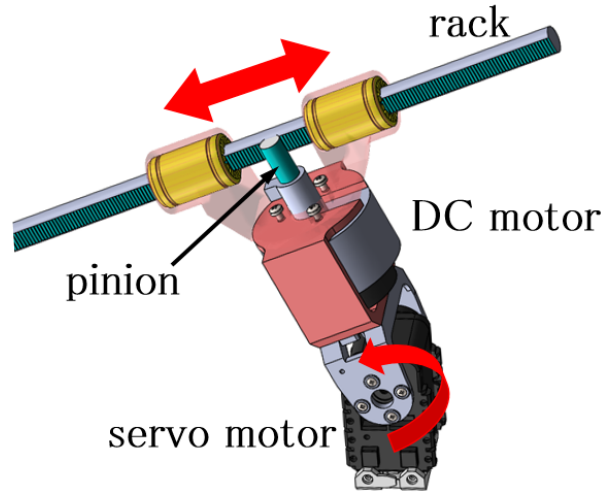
Manipulator’s mechanical design: a servo motor drives the pitching of the end-effector; translational motion is given by a rack-and-pinion transmission driven by a DC motor. As the DC motor spins, the pinion moves the rack housed inside two linear bearings (in yellow). Thanks to the backdrivable motor, the rack’s motion is bidirectional.
